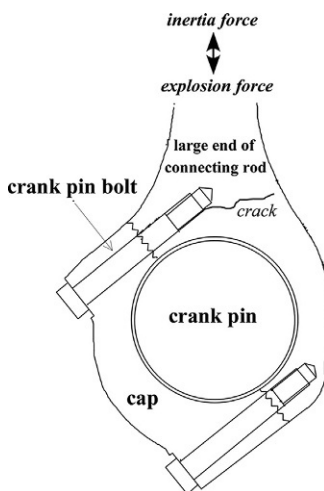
Fatigue failure of large end of connecting rod.
